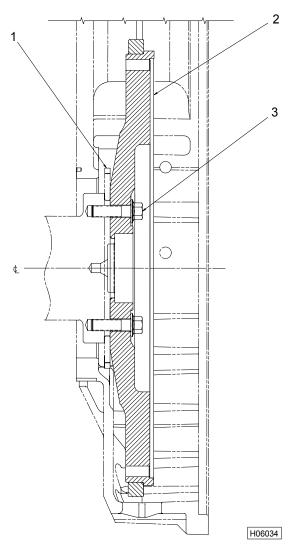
15.5 inch flywheel - for multiple plate clutch applications, 800 lbf·ft and above
